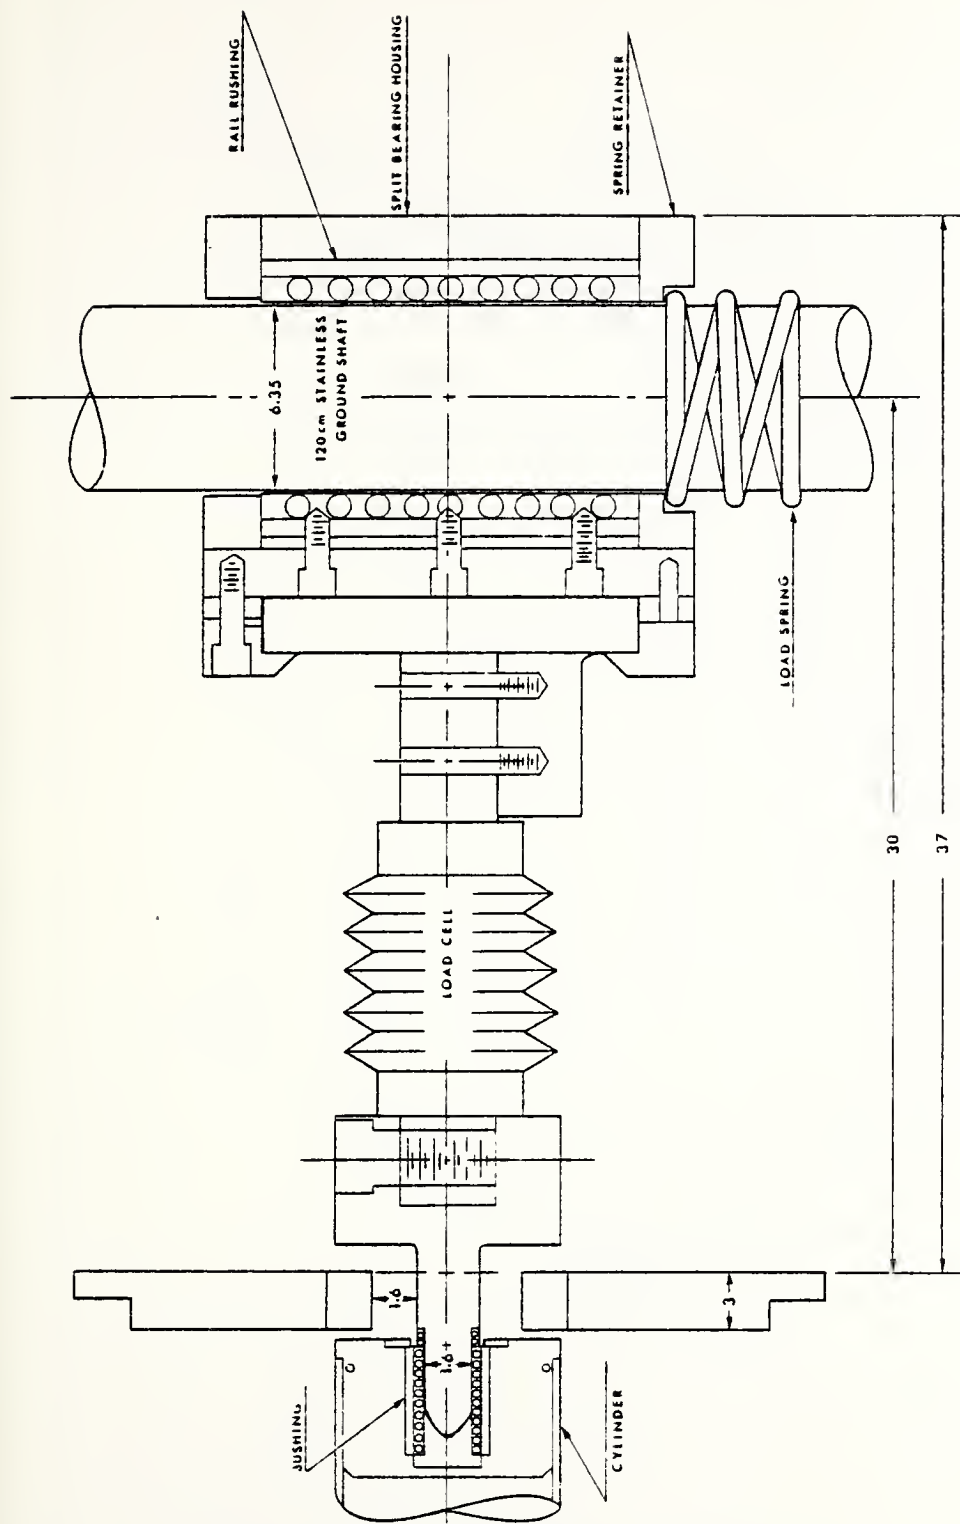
Side Cutaway view of a Load cell and bearing housing. (Dimensions in cm).
